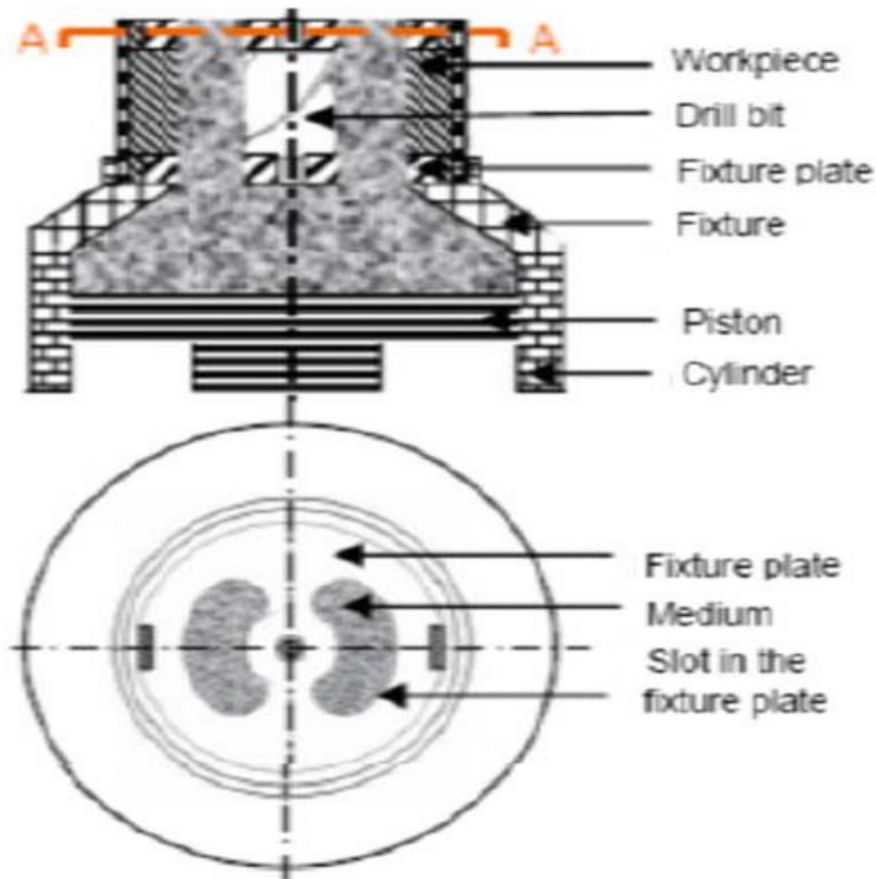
4 Cross-sectional front view of tooling in DBG-AFF process [35]
